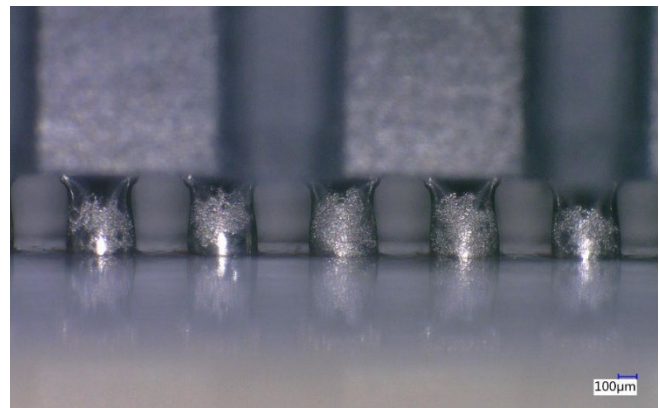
Solder Joint Formation – without Collapsible Solder Balls (Soldered with SAC305 Solder Paste)
